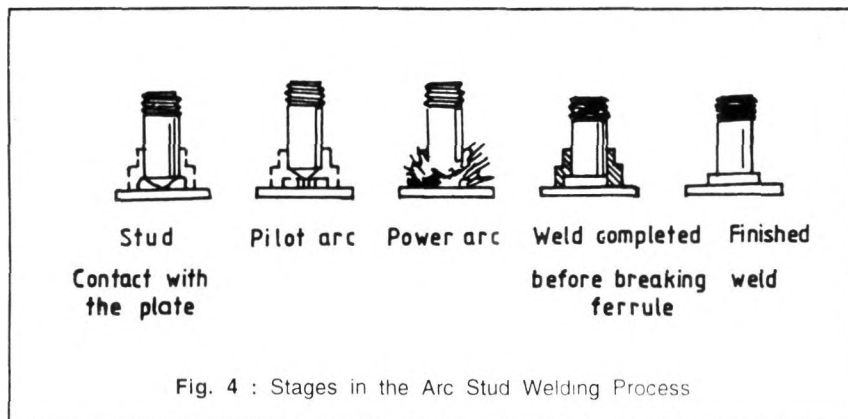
Stages in the Arc Stud Welding Process
